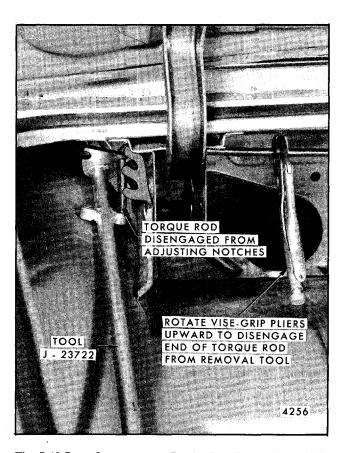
Rear Compartment Torque Rod Removal - Cadillac E Styles
